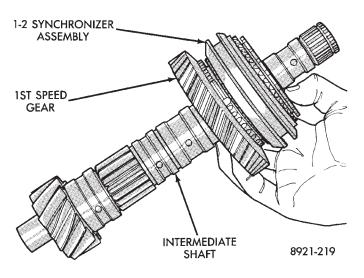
1st Speed Gear and 1-2 Synchronizer Assembly
